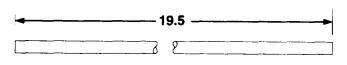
Fuel Pressure Hose Assembly (31-15-2302-80)
